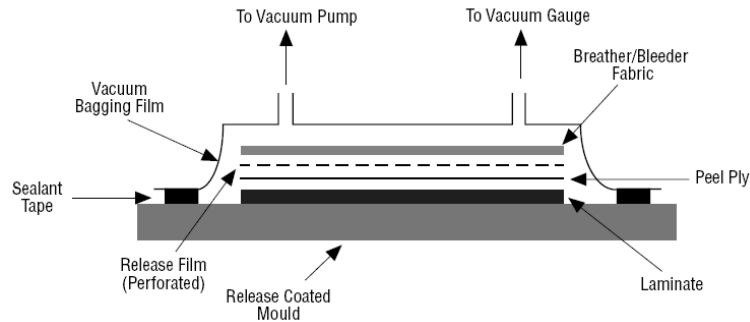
Schematic View of Vacuum Packaging Process [2, 3]
